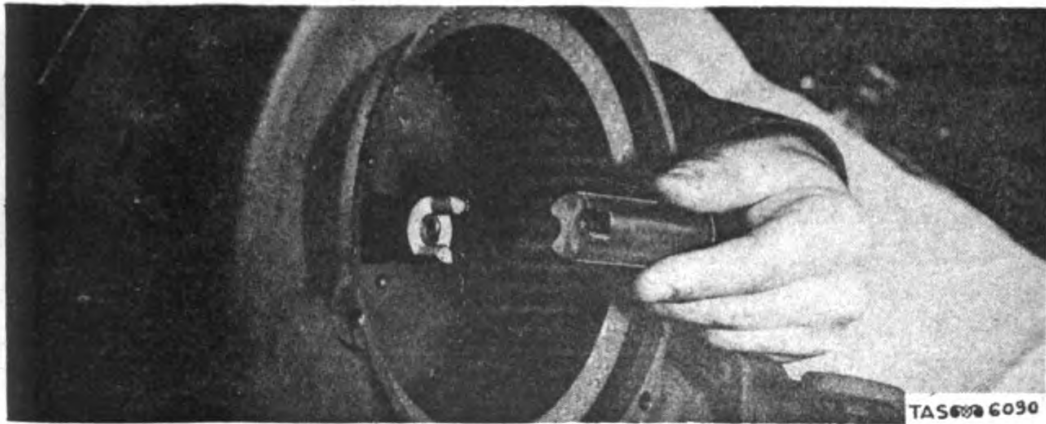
Removing Rubber Coupling Inside Fan Housing.
